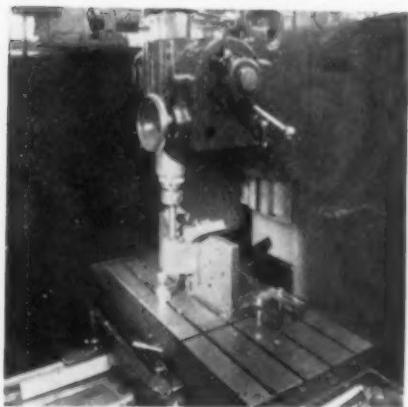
The boring tool replaces the Center Scope, and the set-up is completely ready for execution. Locating time: 2.5 minutes, to accuracy of .0001-in.
